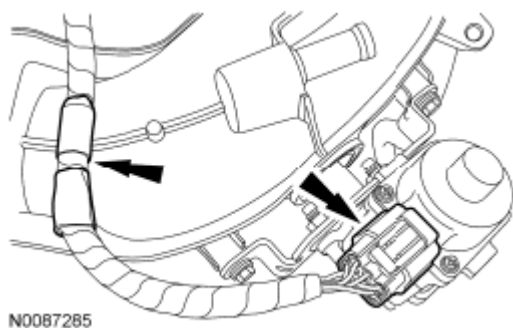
Locating EGR Regulator Electrical Connector & Wiring Retainer
